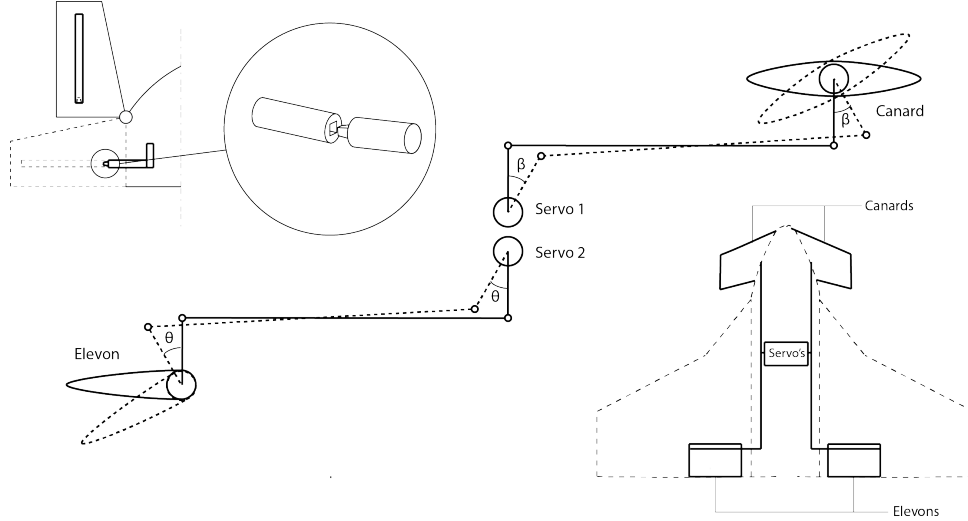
Schematic drawing of the canard and elevon actuating mechanism.
